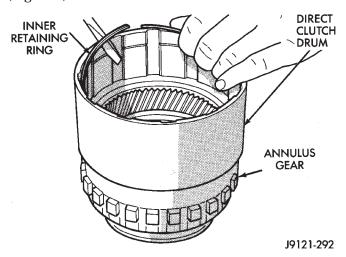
Clutch Drum Inner Retaining Ring Removal
